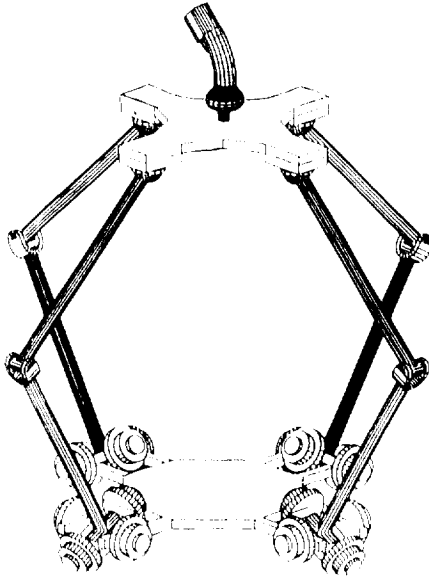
3-Level fault tolerant test-bed 6-DOF, parallel, and redundant actuators; 16 inputs.
